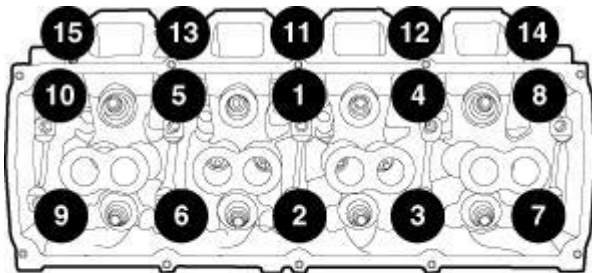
Cylinder Head Bolt Removal & Tightening Sequence
